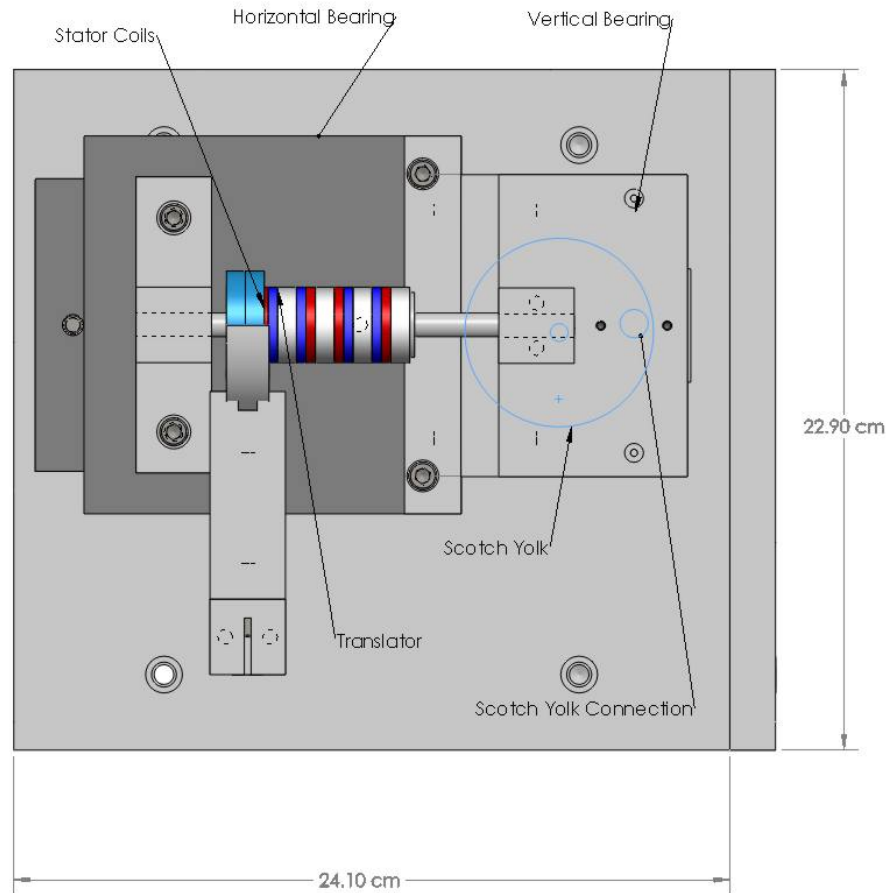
3D CAD model of testing apparatus in a fully retracted position
